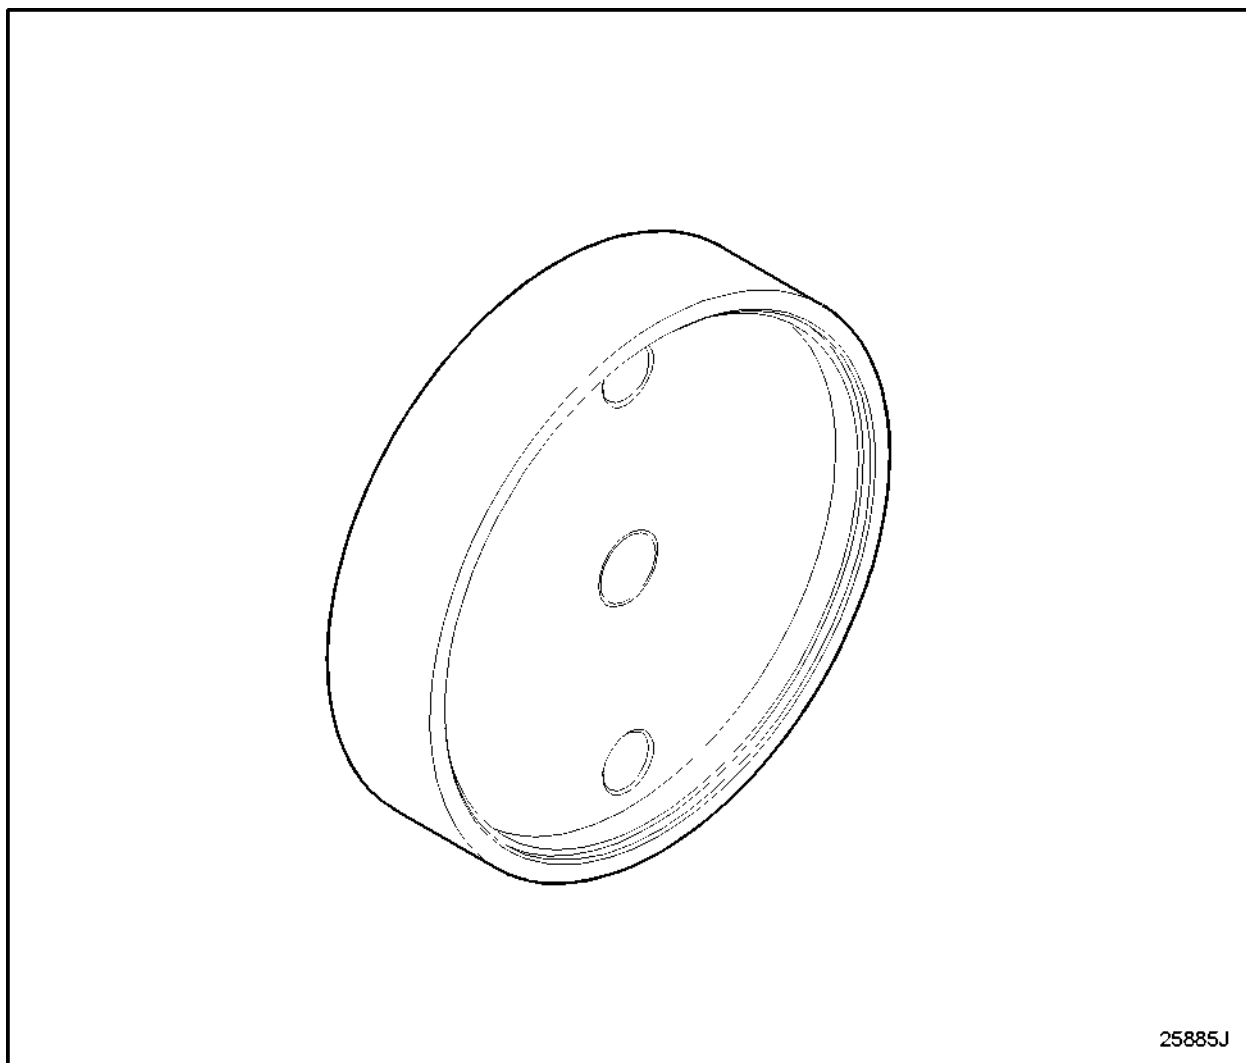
Rear Seal Sleeve Installer,J 33426
